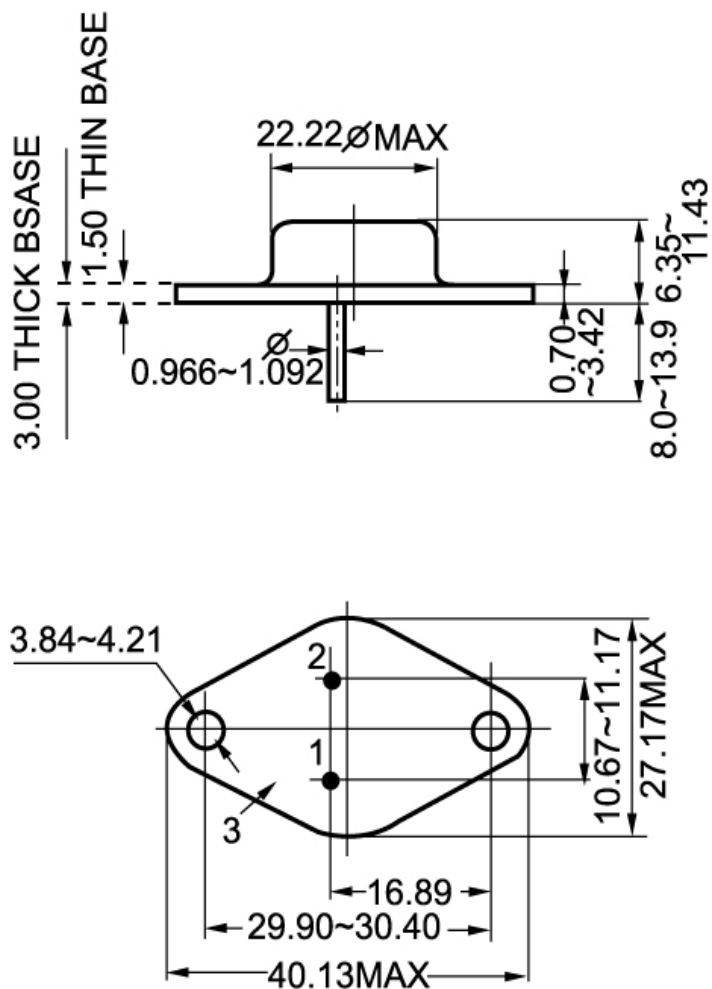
outline dimensions (unindicated tolerance: ± 0.1 mm)
